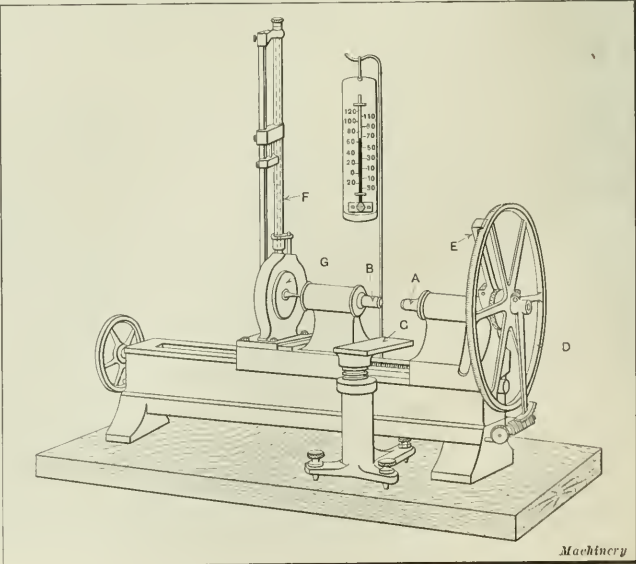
German Type of Measuring Machine, capable of taking extremely Close Measurements
